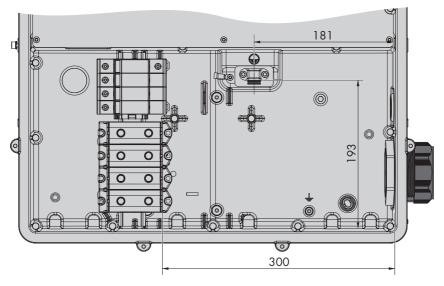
Interior view of the AC connection unit with dimensions for the conductors (Dimensions in mm)
